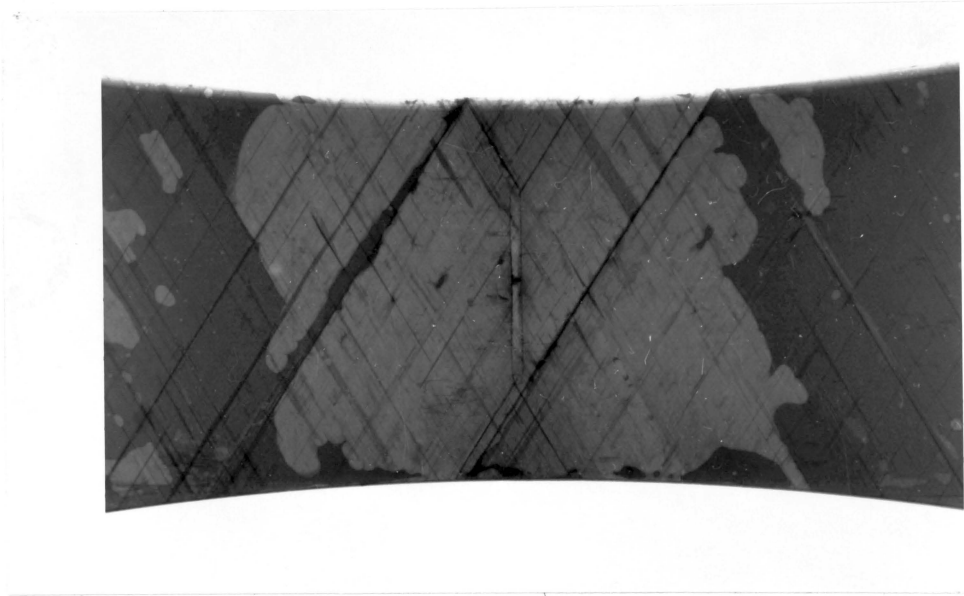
X-Ray Photographs of Typical Specimen at Failure Load
